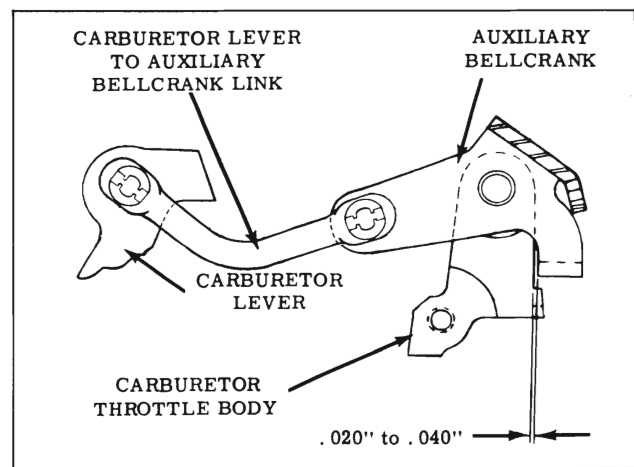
Checking Carburetor Link (4 Bbl.)
